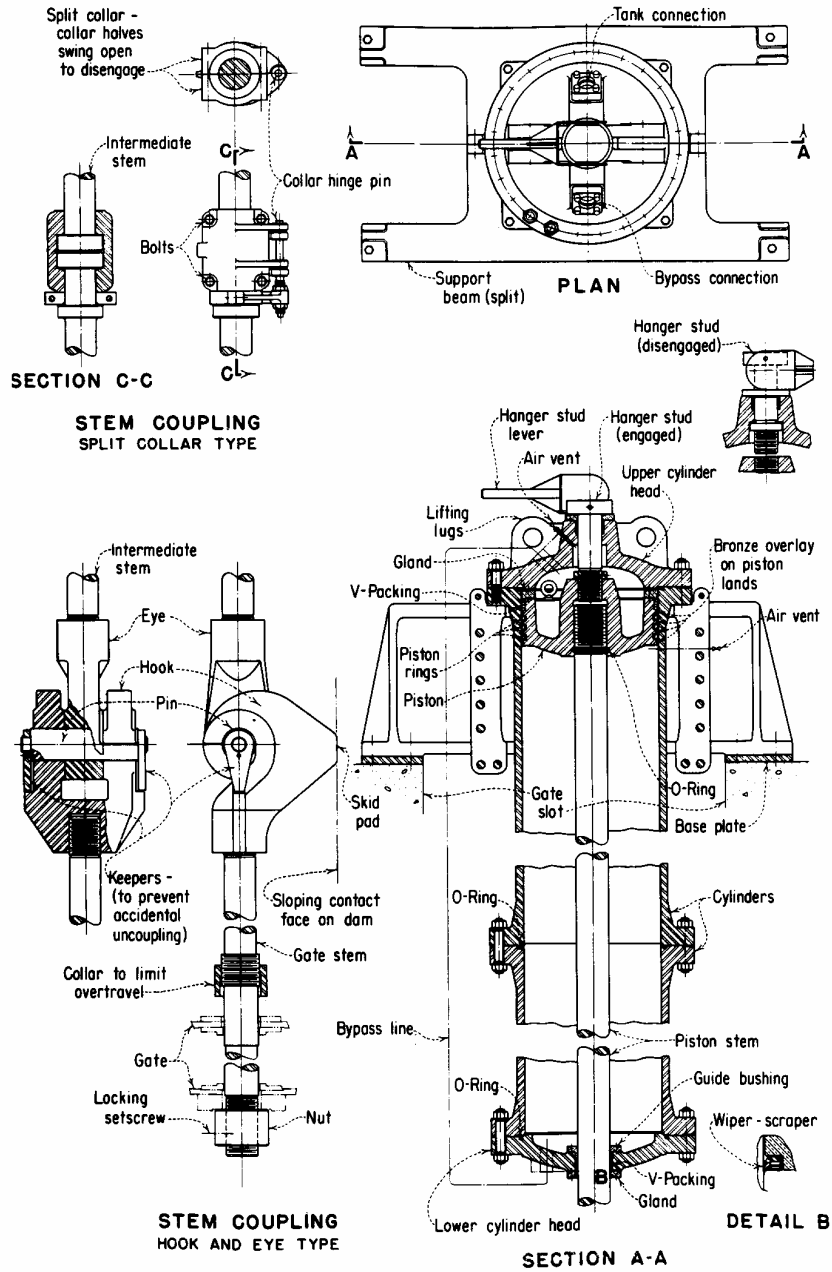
Typical hydraulic hoist system (hydraulic cylinder).
